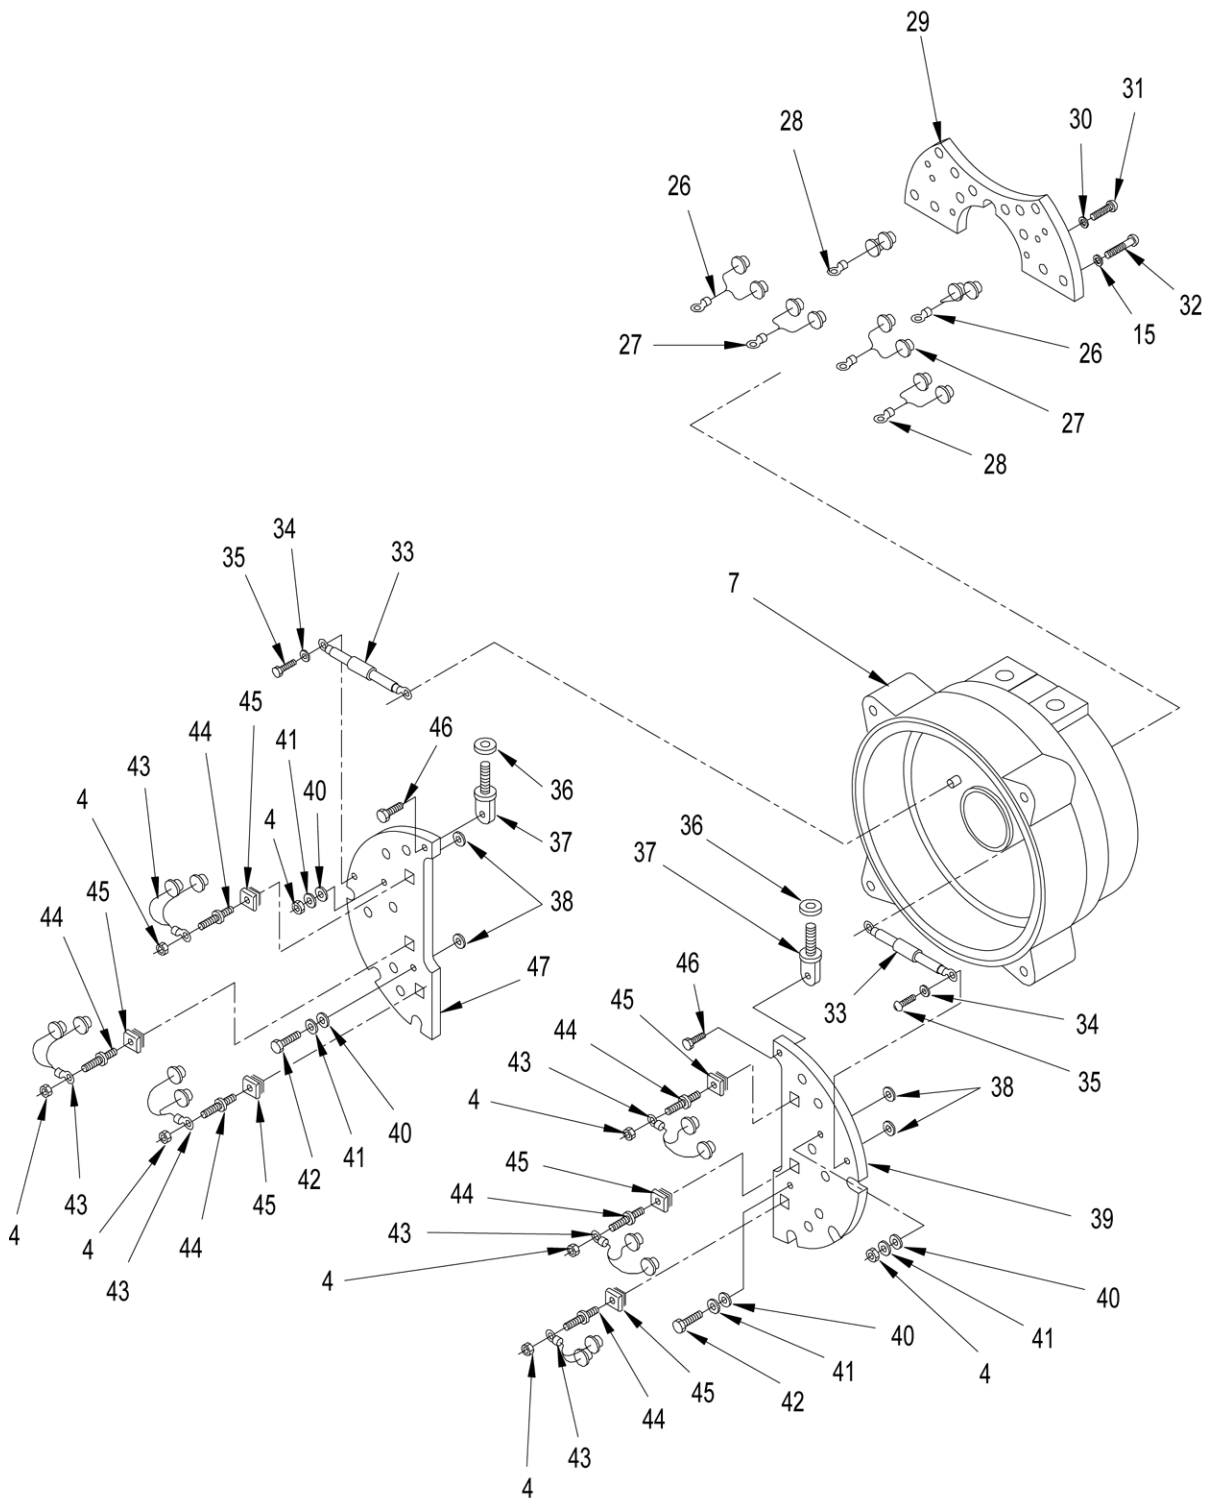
DC Alternator Assembly (MEP-501A) (Sheet 2 of 2).
